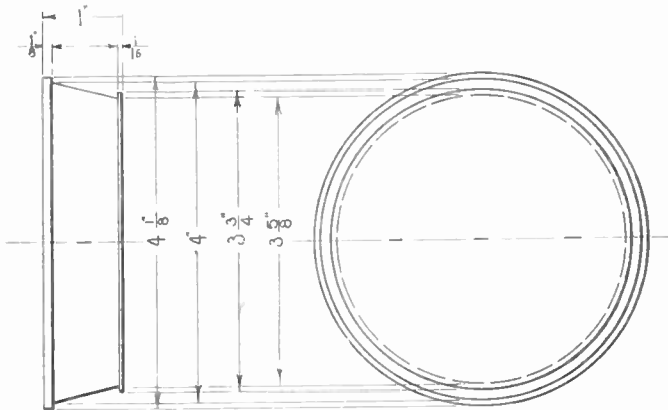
This shows one-half of the ball which supports the rotating coil.
